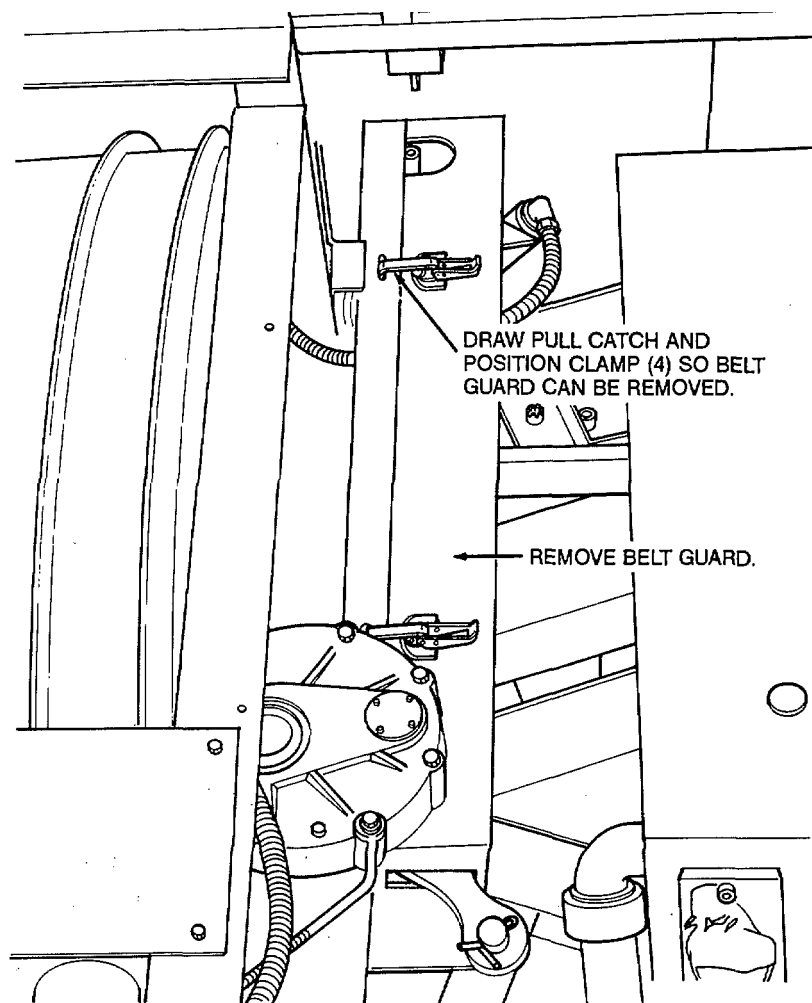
Return (under) conveyor drive belt guard, removal and installation (Model 5230D).
